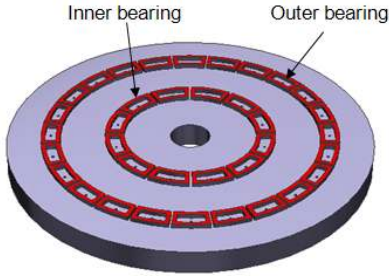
Designed structure of rotary table using the segment type hydrostatic bearings
